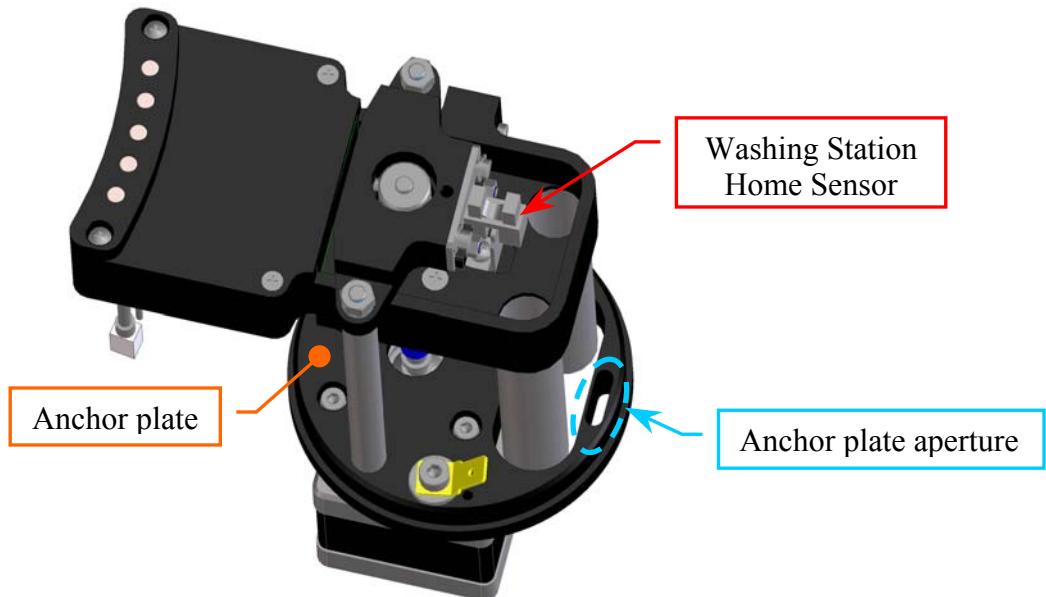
Anchor plate aperture of the Washing Station Assy
